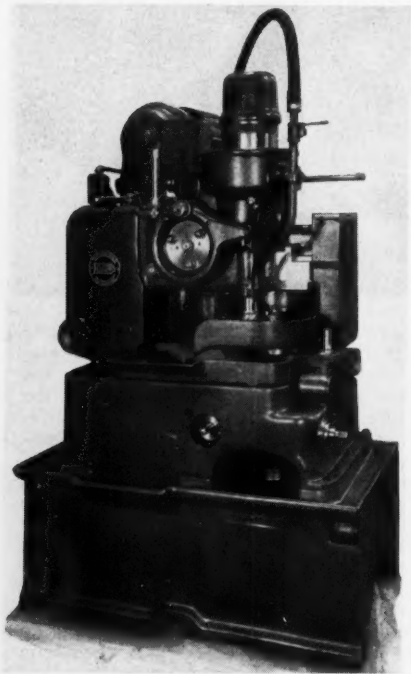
Special Fellows Gear Shaper arranged for using gap-type roughing and finishing Gear Shaper Cutters.
